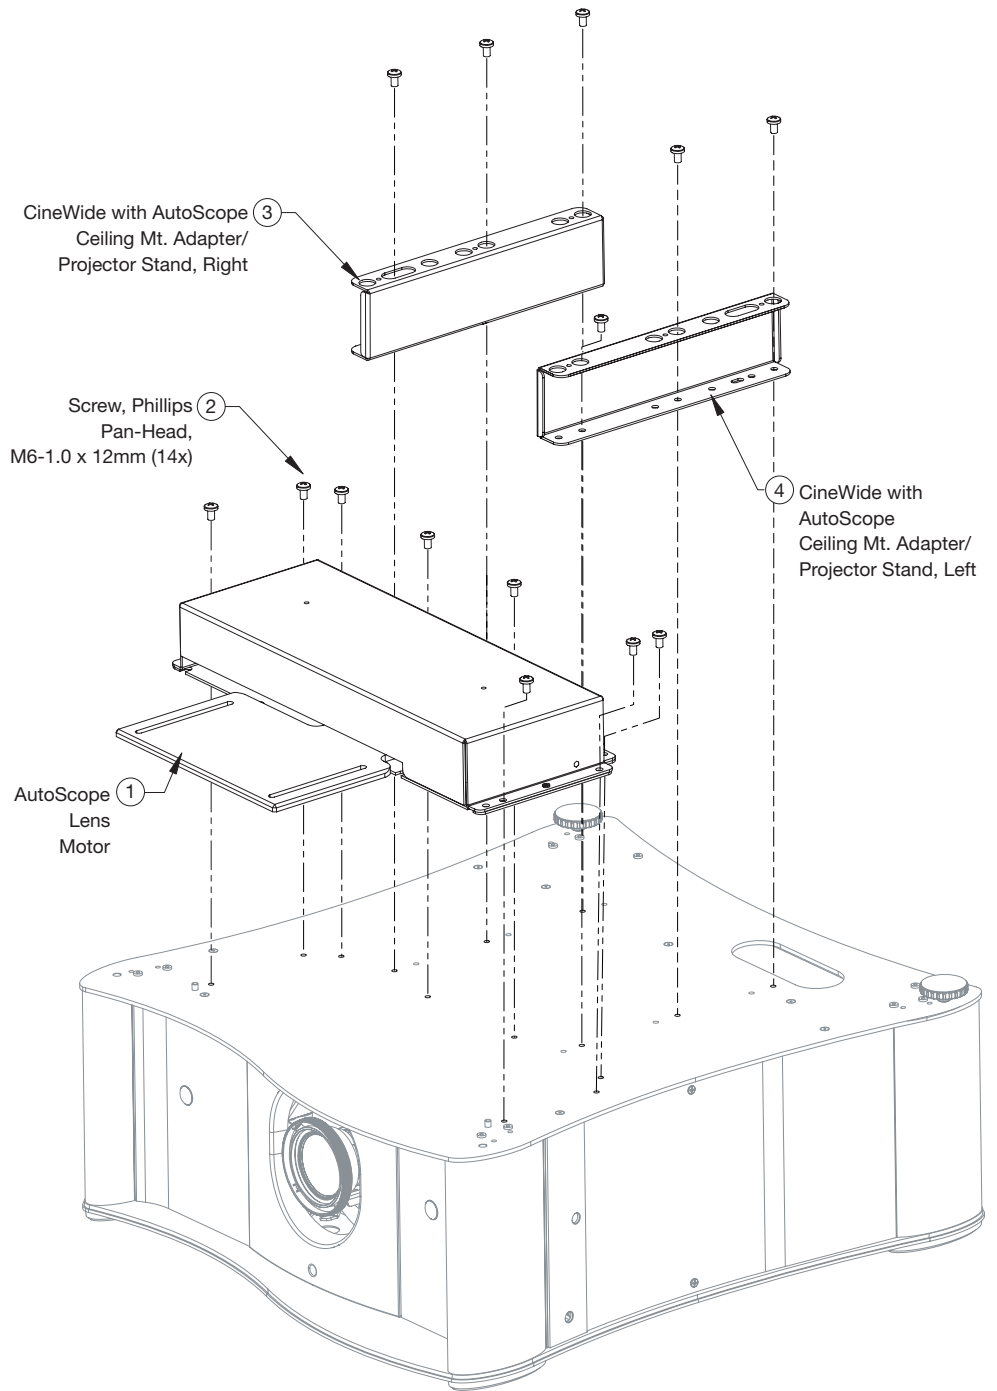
X-200i/CineWide with AutoScope Motor Assembly – Exploded View
